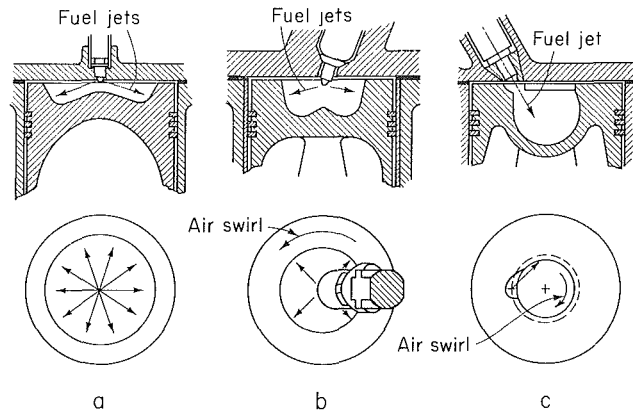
Common types of direct-injection compression-ignition or diesel engine combustion systems: (a) quiescent chamber with multi-hole nozzle typical of larger engines; (b) bowl-in-piston chamber with swirl and multi-hole nozzle; (c) bowl-in-piston chamber with swirl and single-hole nozzle. (b) and (c) used in medium to small DI engine range.
